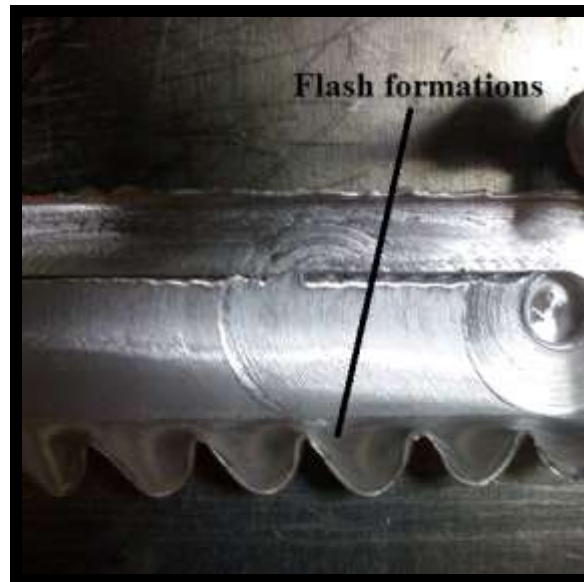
Flash formations during FSW at 10 mm/min welding speed.
